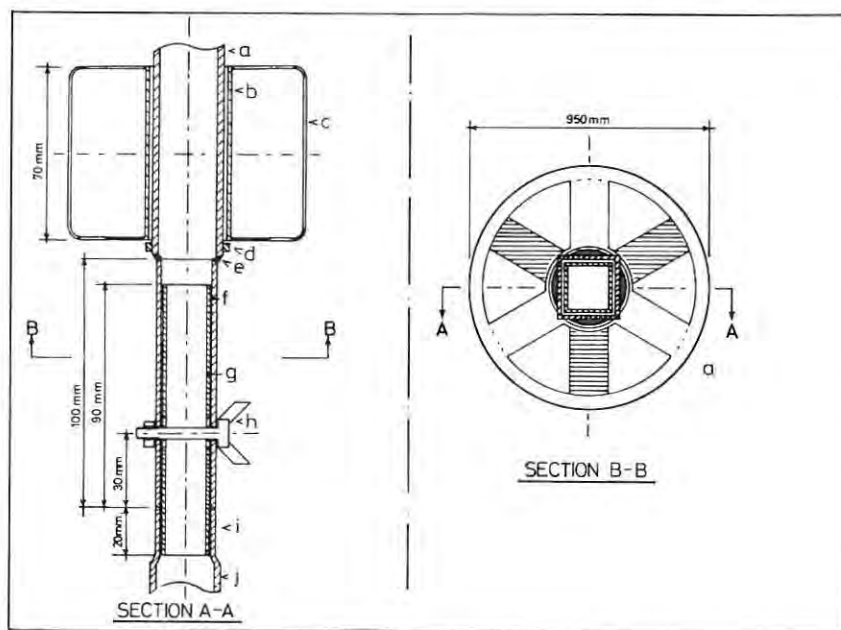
Connecting pieces of drill rods and centering pieces. a: circular rods. b: centering pieces. d: rim on which centering piece rests. e: soft solder. f: upper rectangular connecting piece. g: lower connecting piece. h: wing screw.
